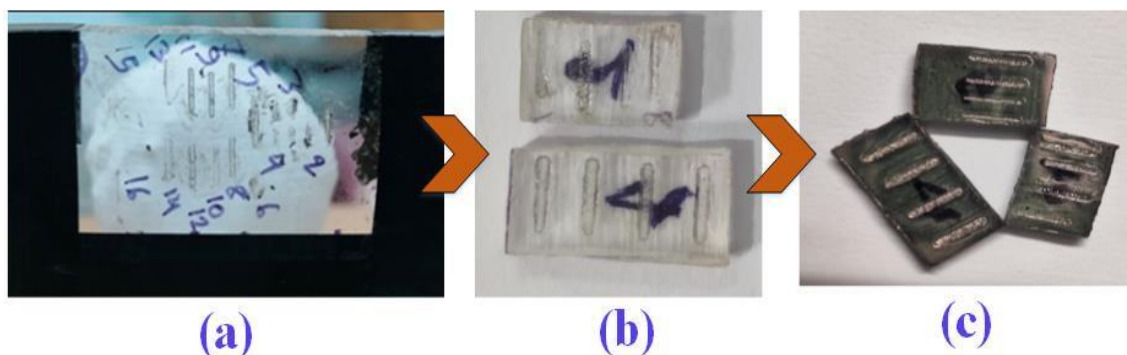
PMMA workpiece after Nd:YAG laser transmission cutting in water medium, (a) Parent sample, (b) Sliced micro-machined sample, (c) Gold coated micro-machined sample.
